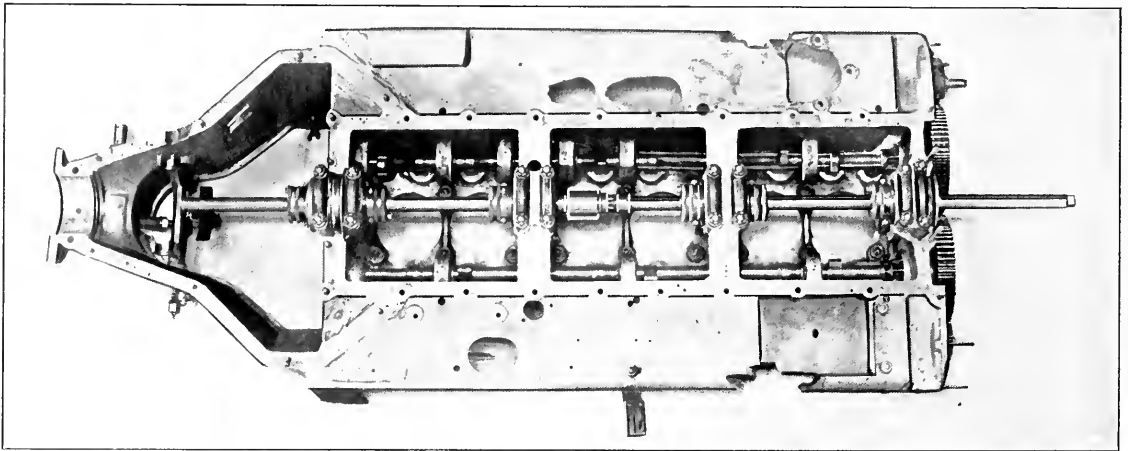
Martell Aligning Reamer refinishing the Bearings of the Crank-case of a Packard 1912 Model Six-cylinder Motor
